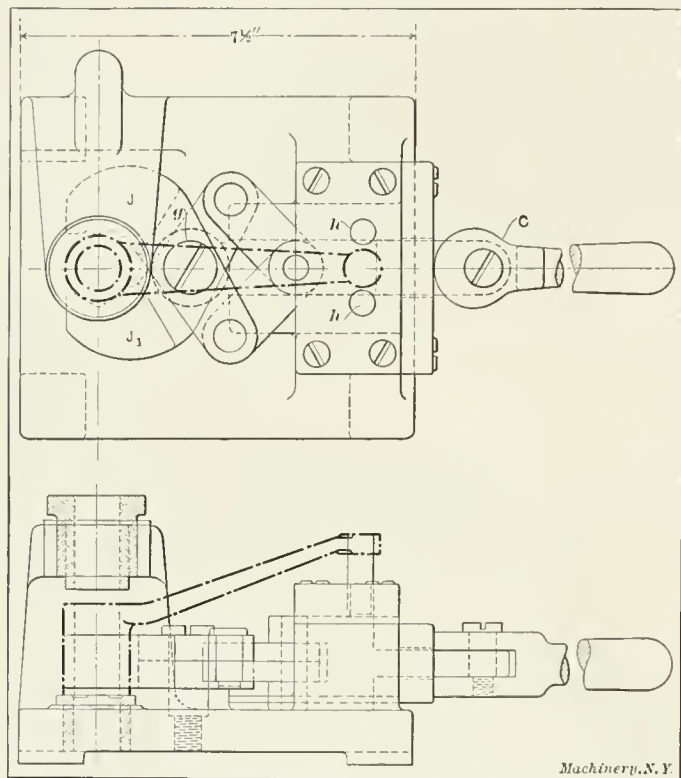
Drilling and Reaming Fixture with Toggle Clamping and Locating Jaws
